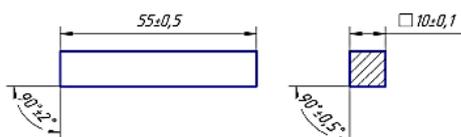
Geometric dimensions of blanks from CADI and austenitic stainless steel AISI 316L.
